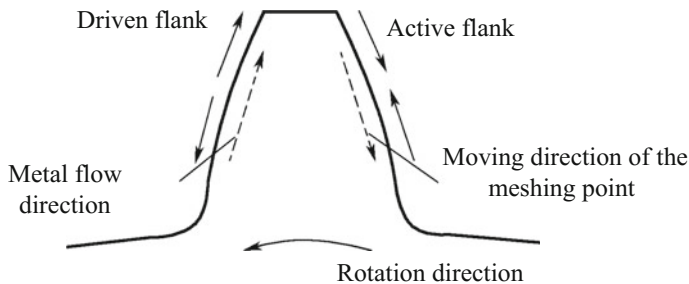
Metal flow conditions on the surface of the workpiece
